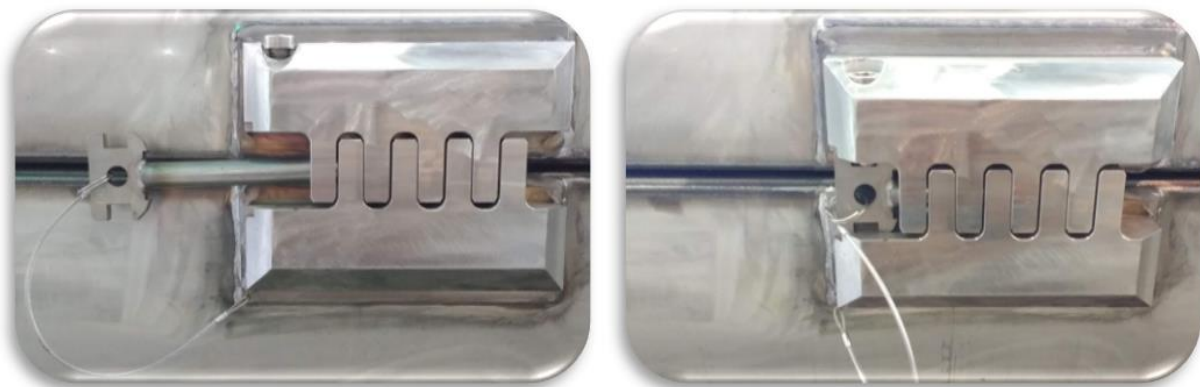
Operation of the DN30 valve protecting device and its housing (left: open position, right: closed position)
